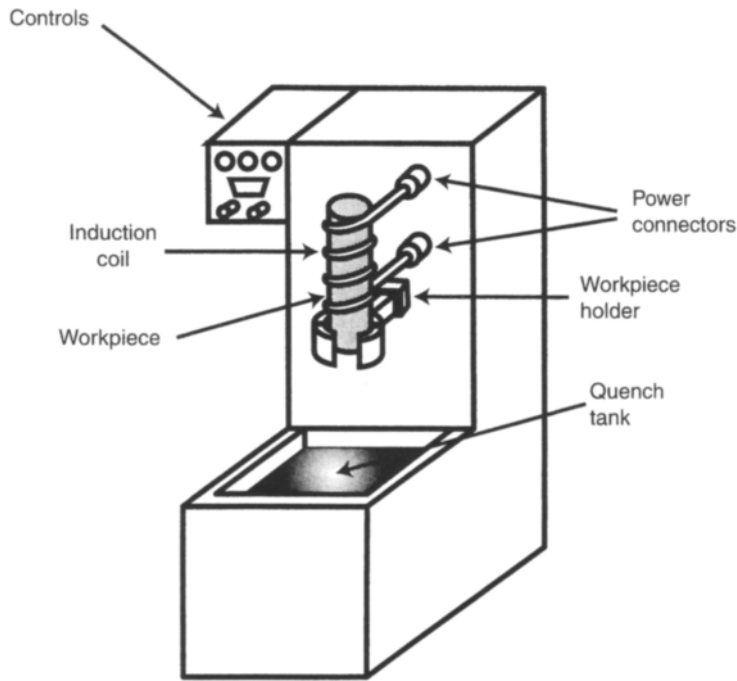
Simple arrangement for induction hardening a steel workpiece by heating and quenching.
